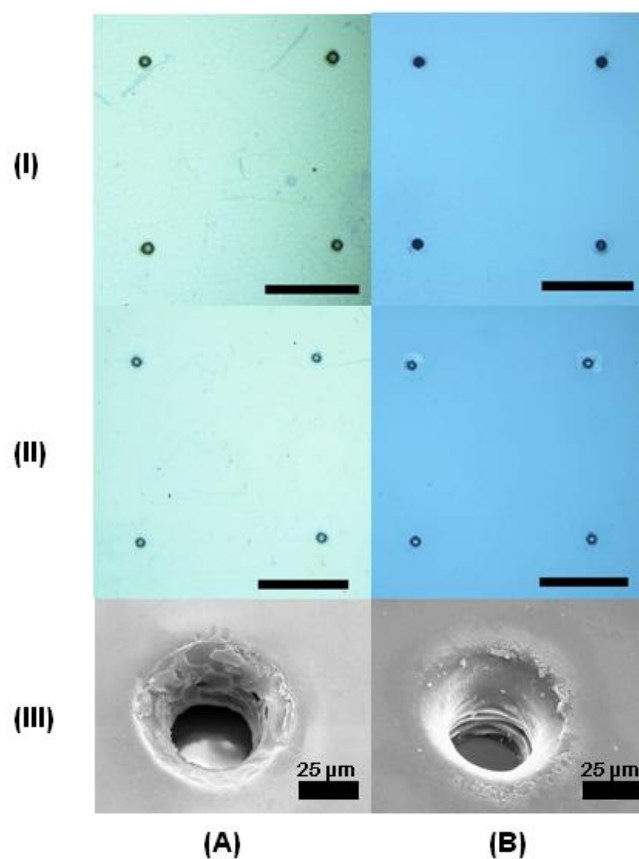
Laser stencil machined holes. Using Si stencils with 25 μm openings in (A) 50 μm thick Kapton® films and (B) 50 μm thick PDMS films: (I) Frontside view of hole array, (II) Backside view of hole array [scale bars = 500 μm], (III) SEM of individual hole from frontside.
